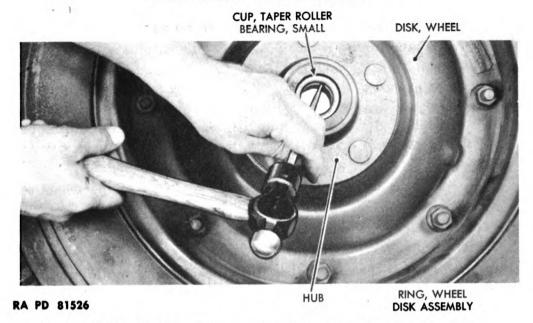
Driving Out the Small Taper Roller Bearing Cup
